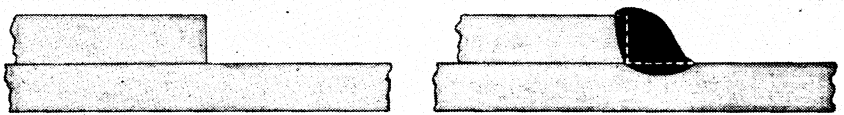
Lap weld; second weld necessary to form double lap weld is shown by dotted line.
